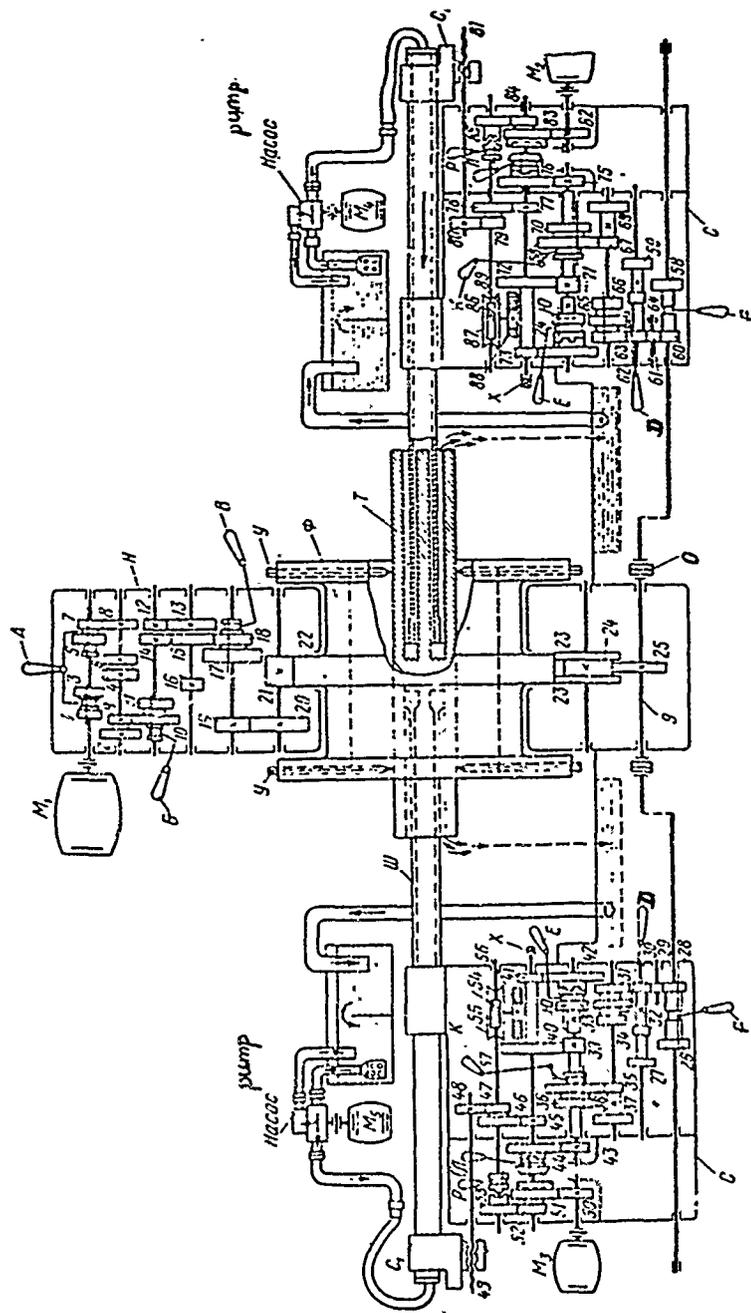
Kinematic scheme of horizontal two-sided drilling and boring machine --- 2
